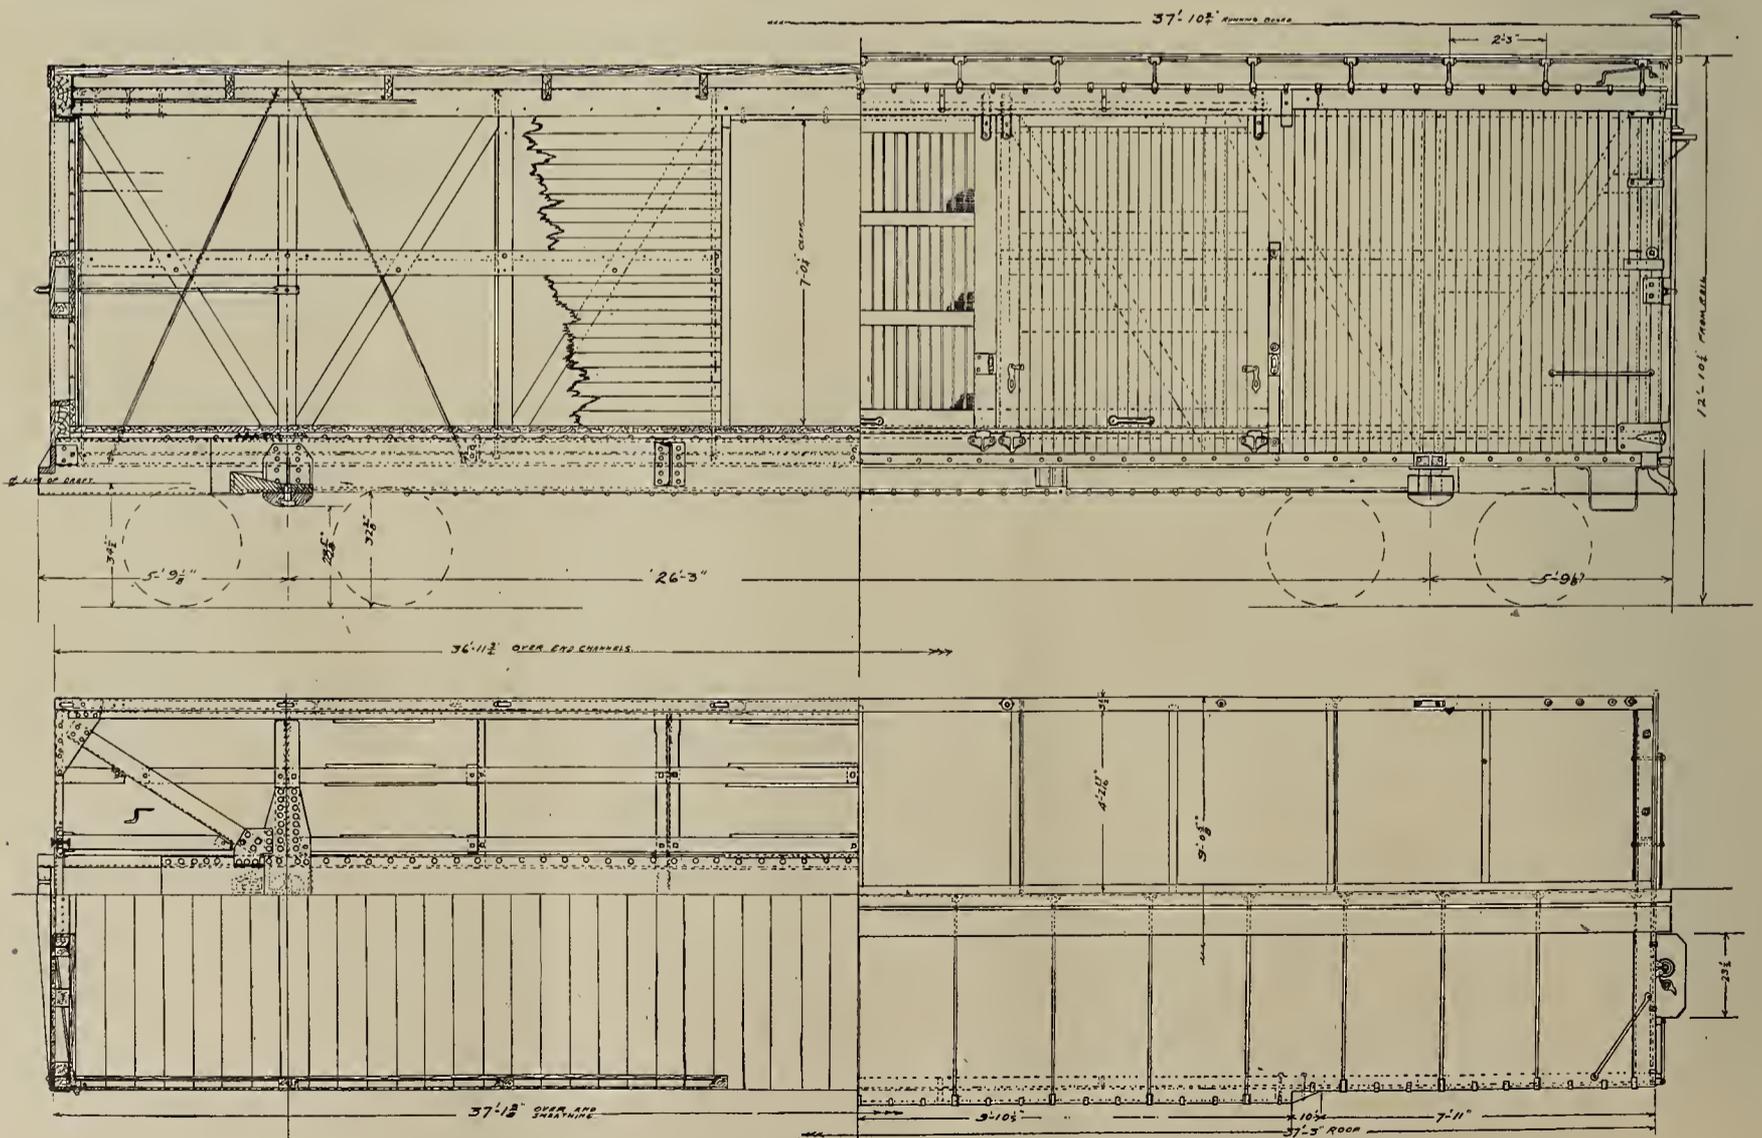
PLAN AND ELEVATION OF 30-TON BOX CAR.
